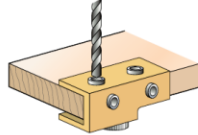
A drilling jig that has been clamped to the corner of the workpiece to get the holes in the correct place
